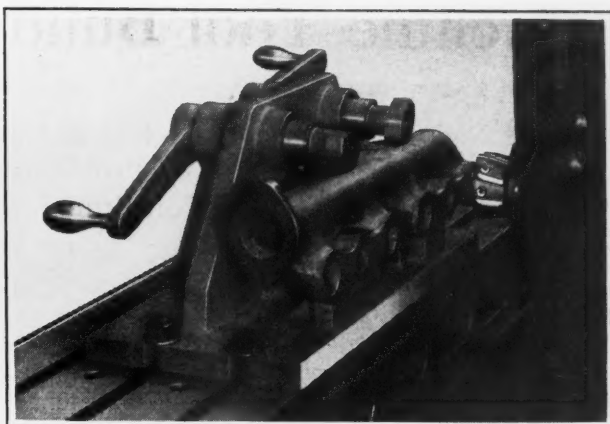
Milling Small Manifolds with a Feed of 52 Inches per Minute
